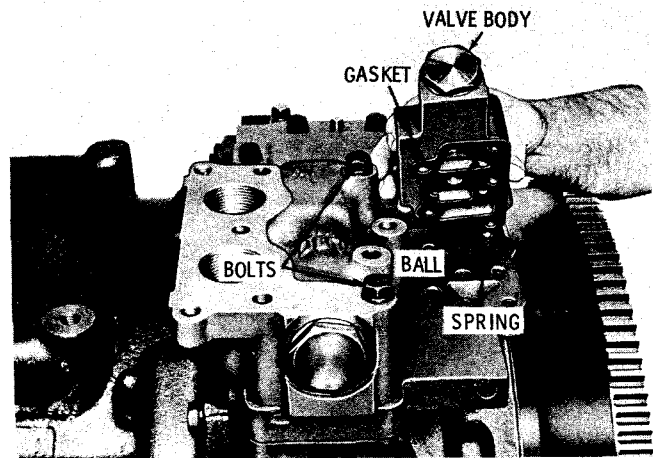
Installing stator control valve body assembly (VCLT, VCLBT)
